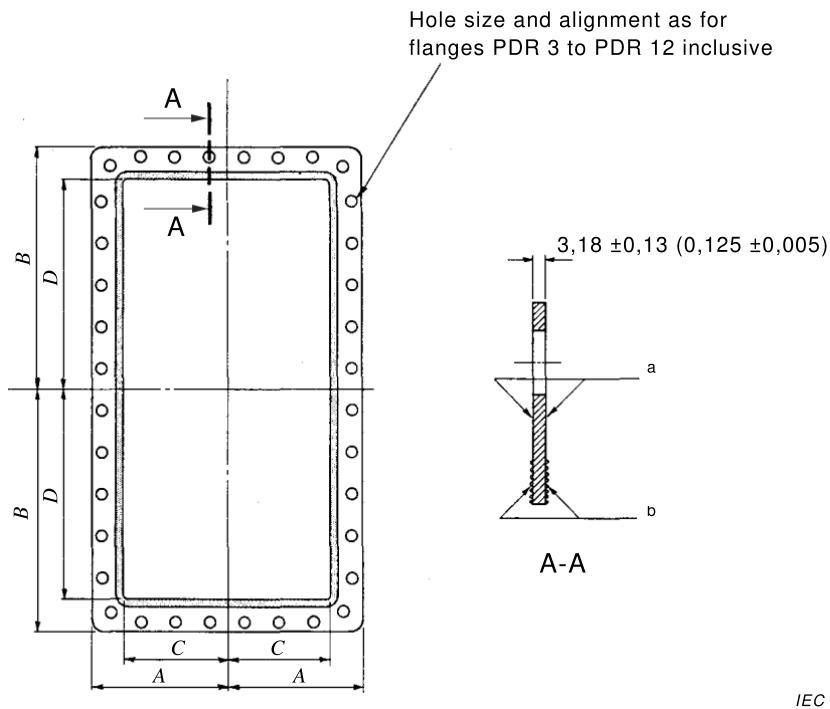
Flange type C: 60154 IEC-PCR 220-500 gasket
